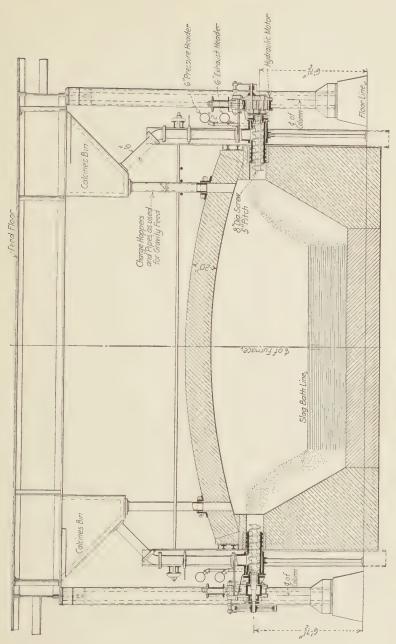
Ambler screw feed for reverberatory smelting furnace.
